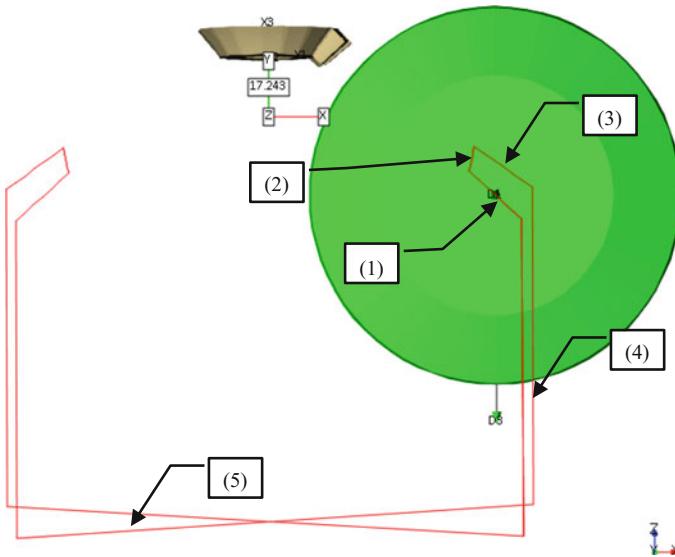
Coniflex cycle on a 5 axis CnC machine
